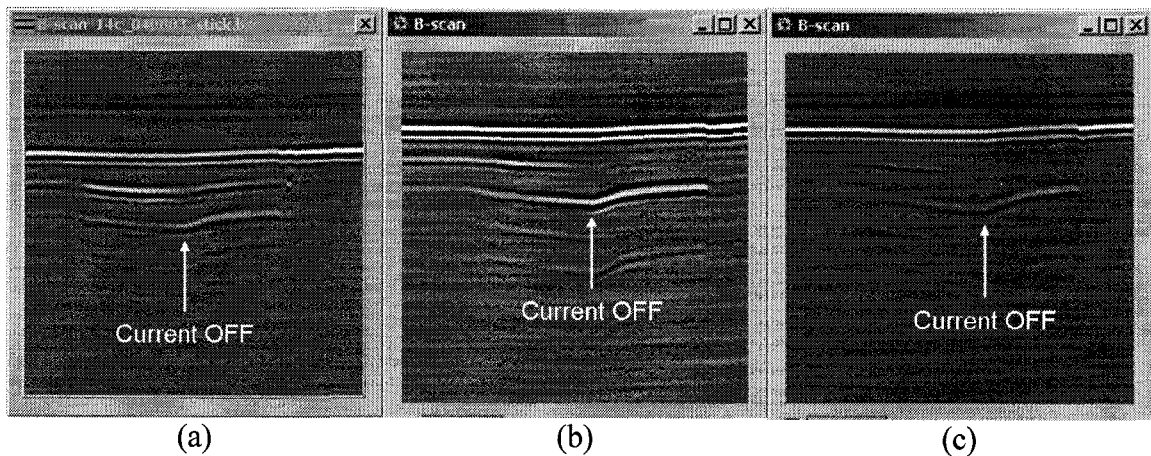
Signatures of undersize welds. (a) stick weld; (b) stick weld with minor melting; (c) 2.5 mm nugget; solid-liquid interfaces are too small to show visible reflection.
